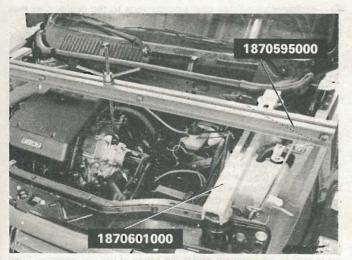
FIAT special tools used to support engine during gearbox removal (Sec 5)
